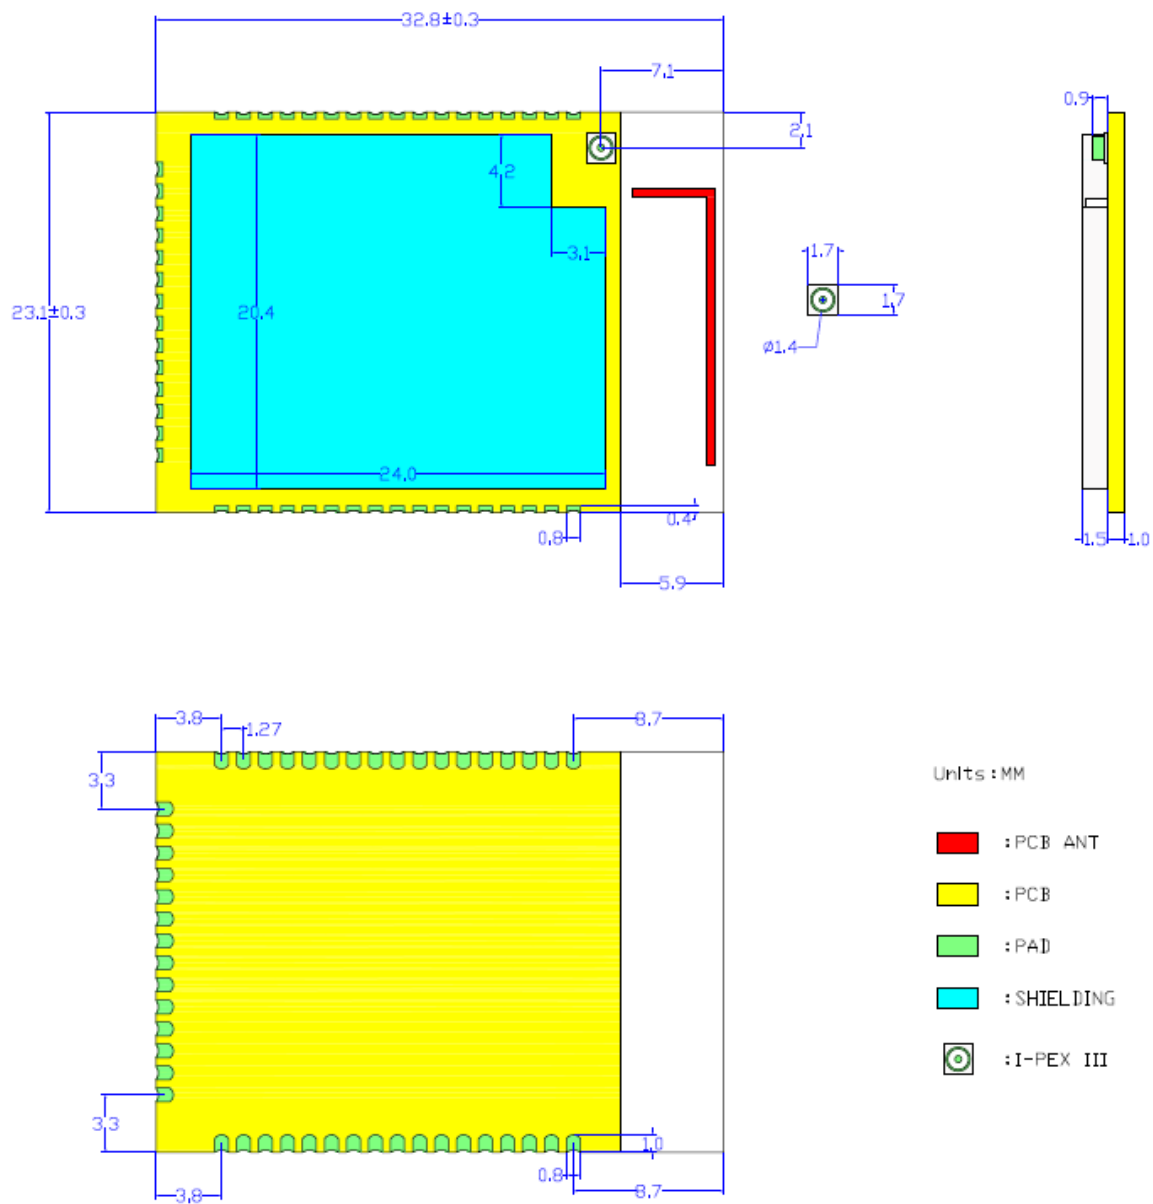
HF-LPD100-1 and -0 Mechanical Dimension
